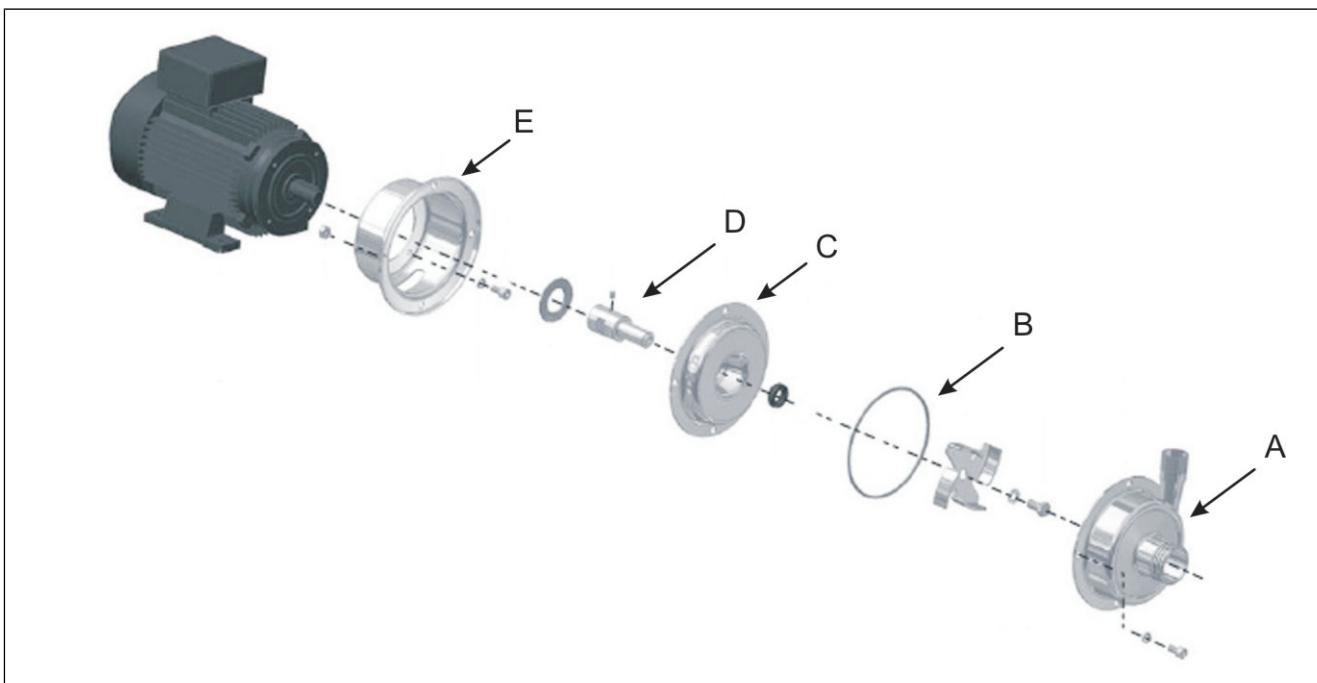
Parts of Tapflo pump: A. Cover, B. O-ring, C. Ring, D. Shaft sleeve, E. Back cover.
